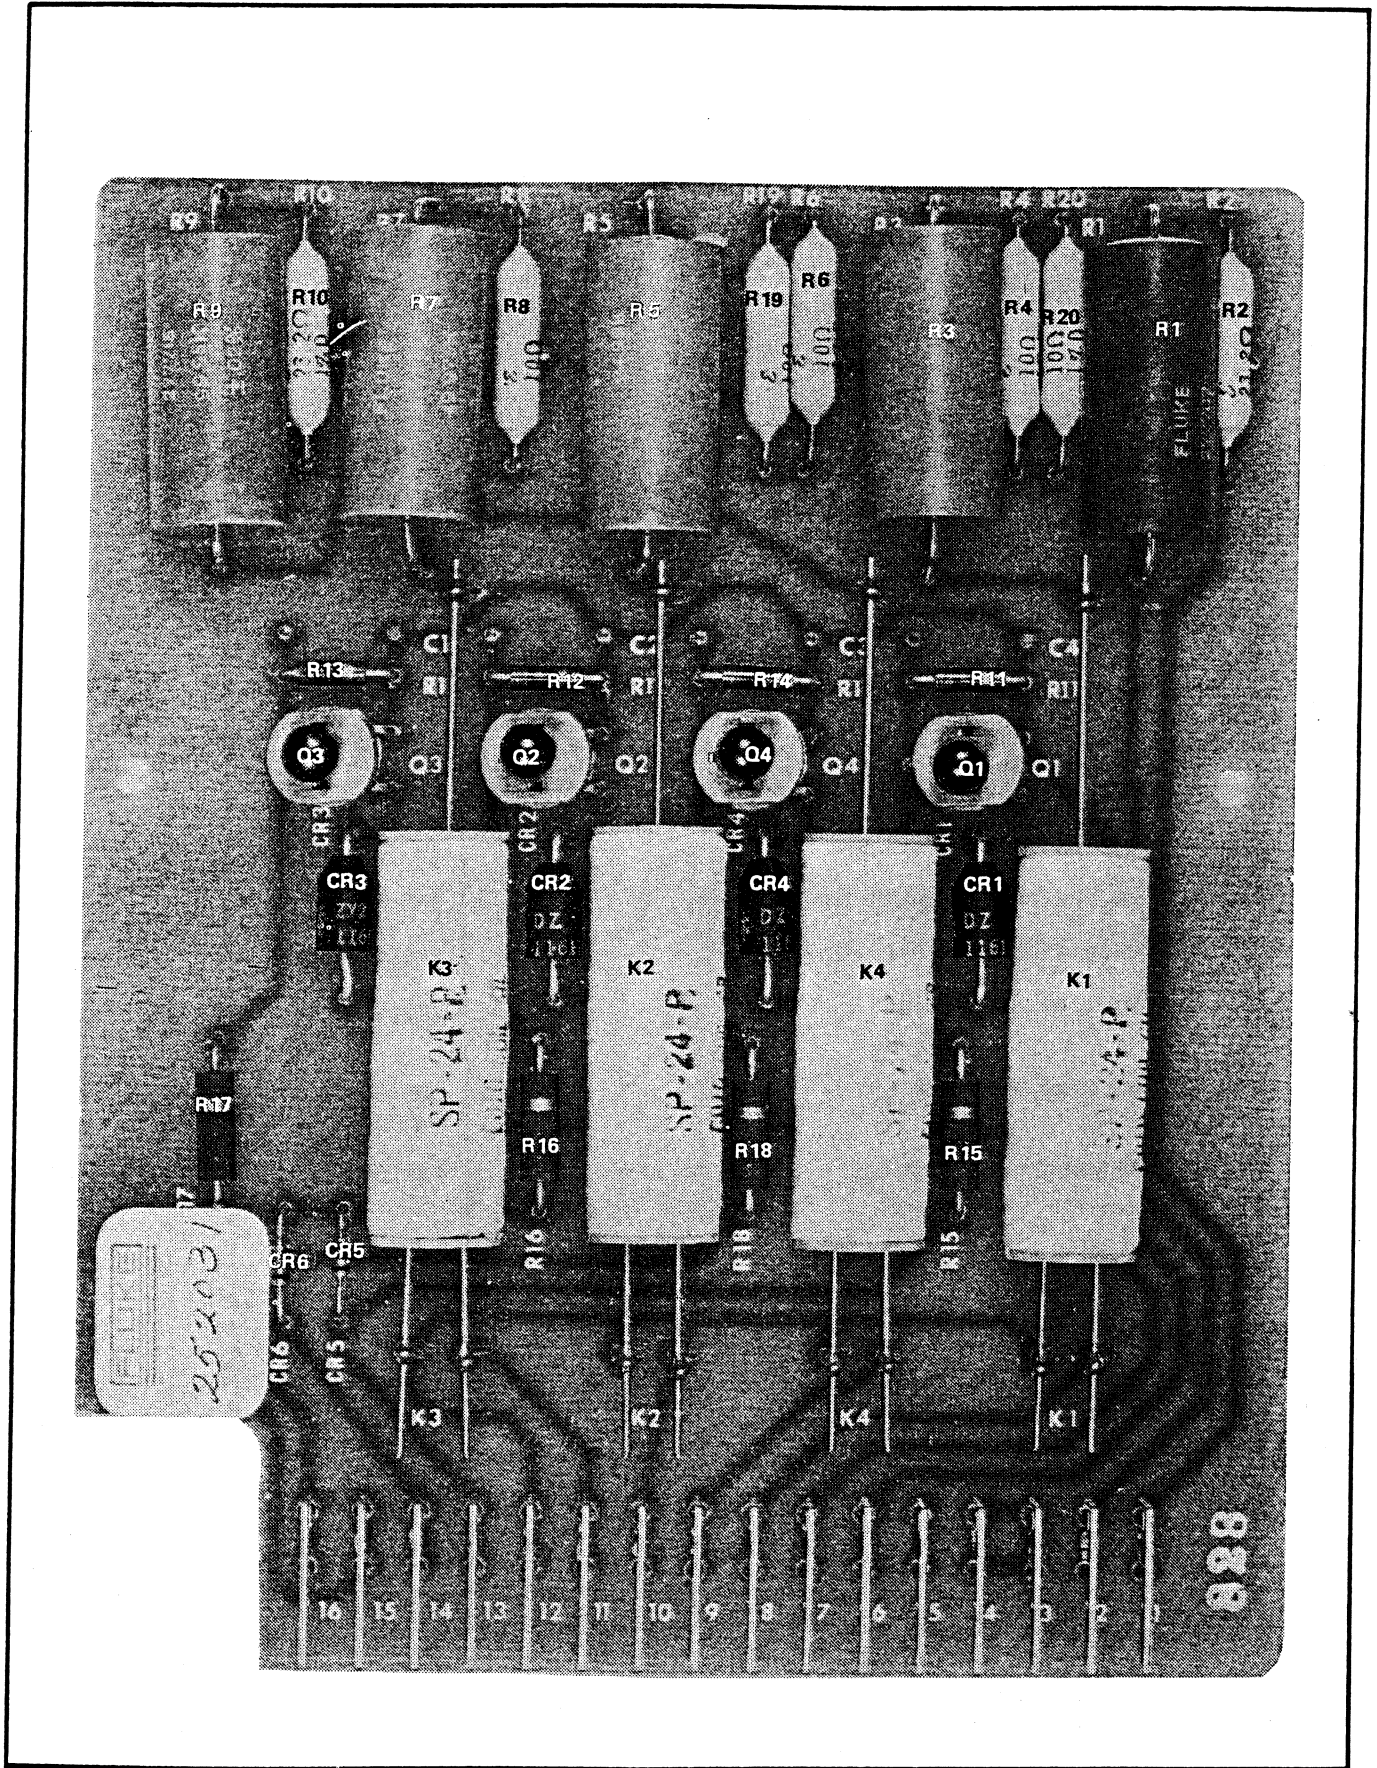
LADDER DRIVER NO. 4 ASSEMBLY
